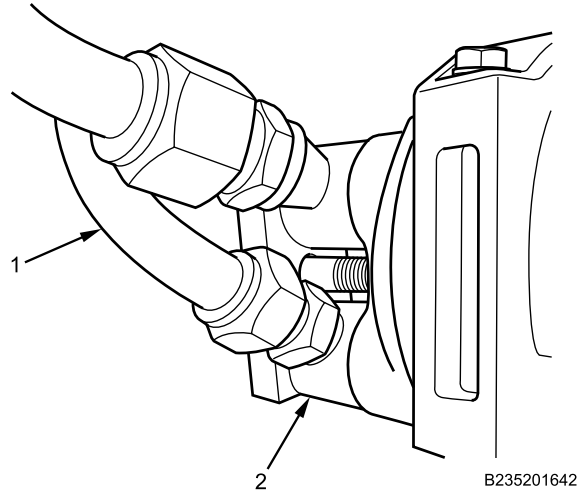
HVAC Compressor Discharge Hose at Compressor.
